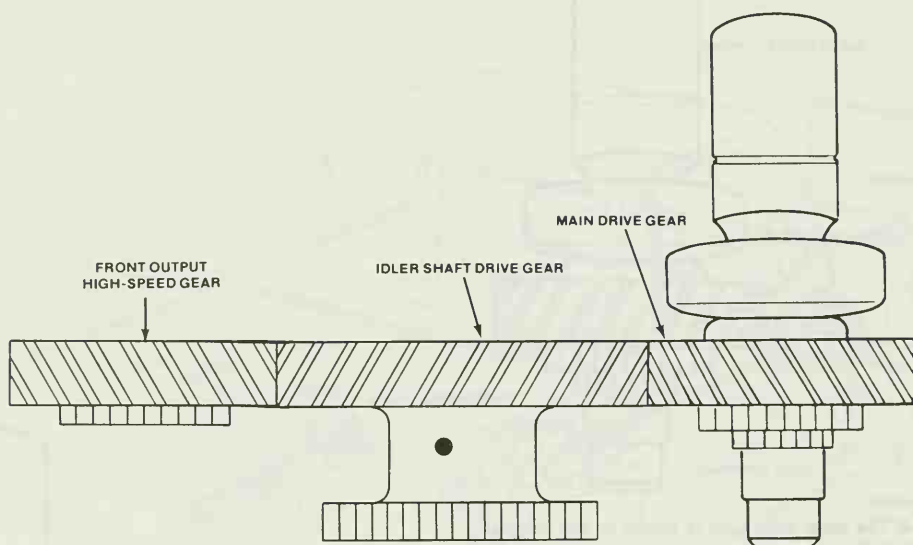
The front output high-speed gear is in mesh with the idler shaft drive gear.
